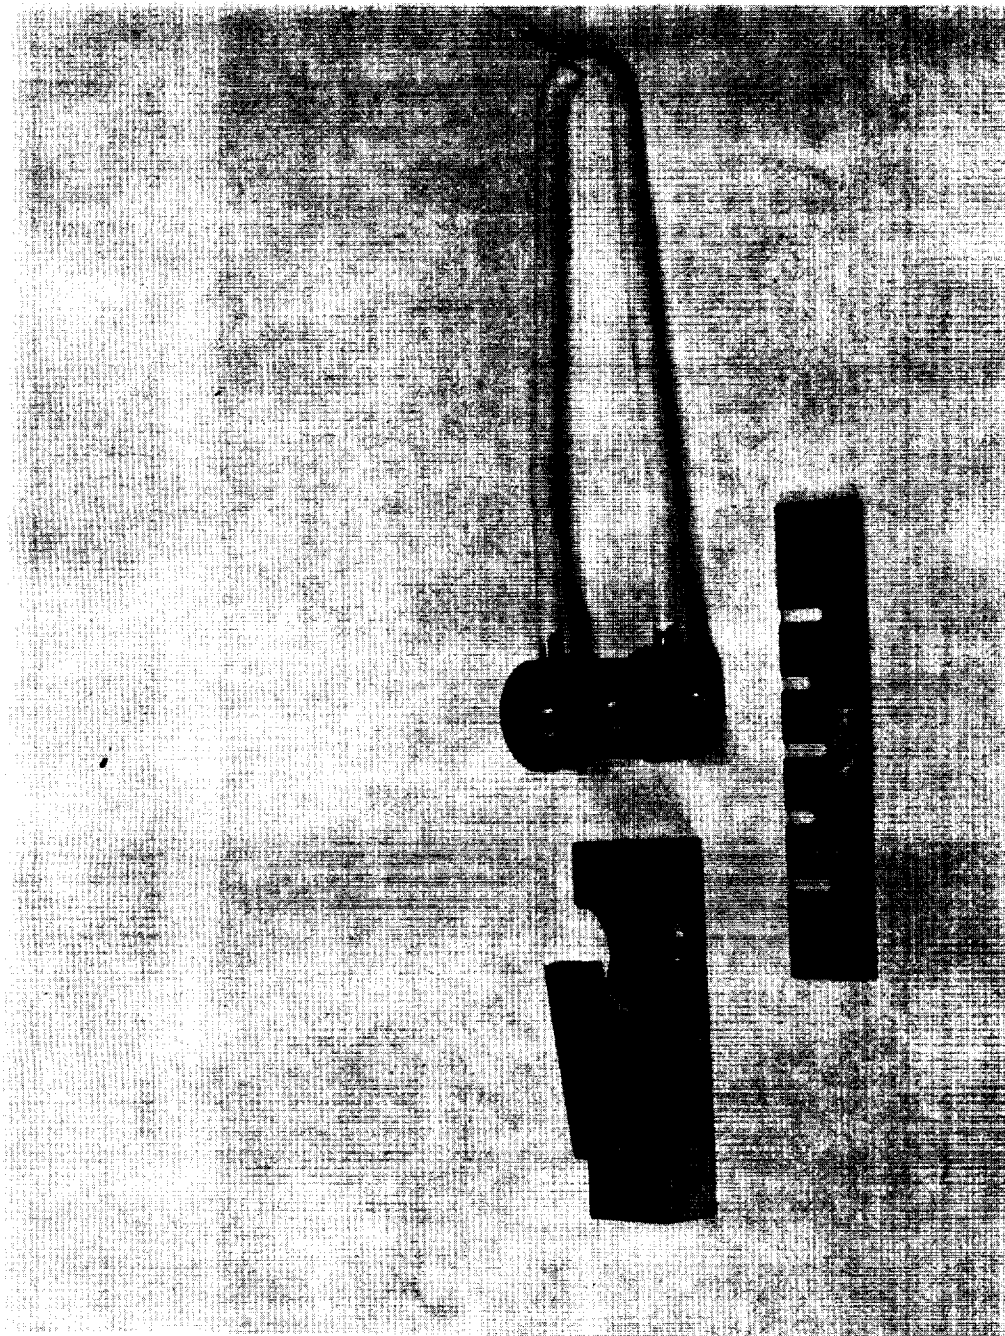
Photograph of mechanism for releasing the cables. L-61-5285
